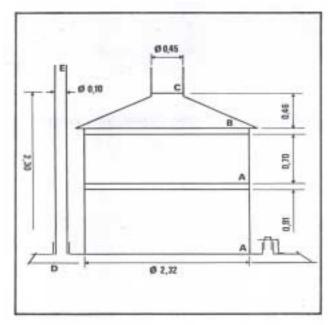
Improved reverse draught charcoal kiln with an iron sheet housing /11/
